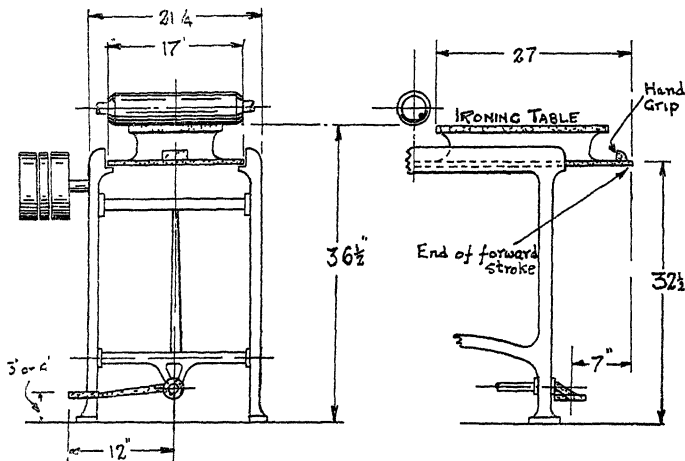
Part front and side elevation of Shirt Collar Ironing Machine.
